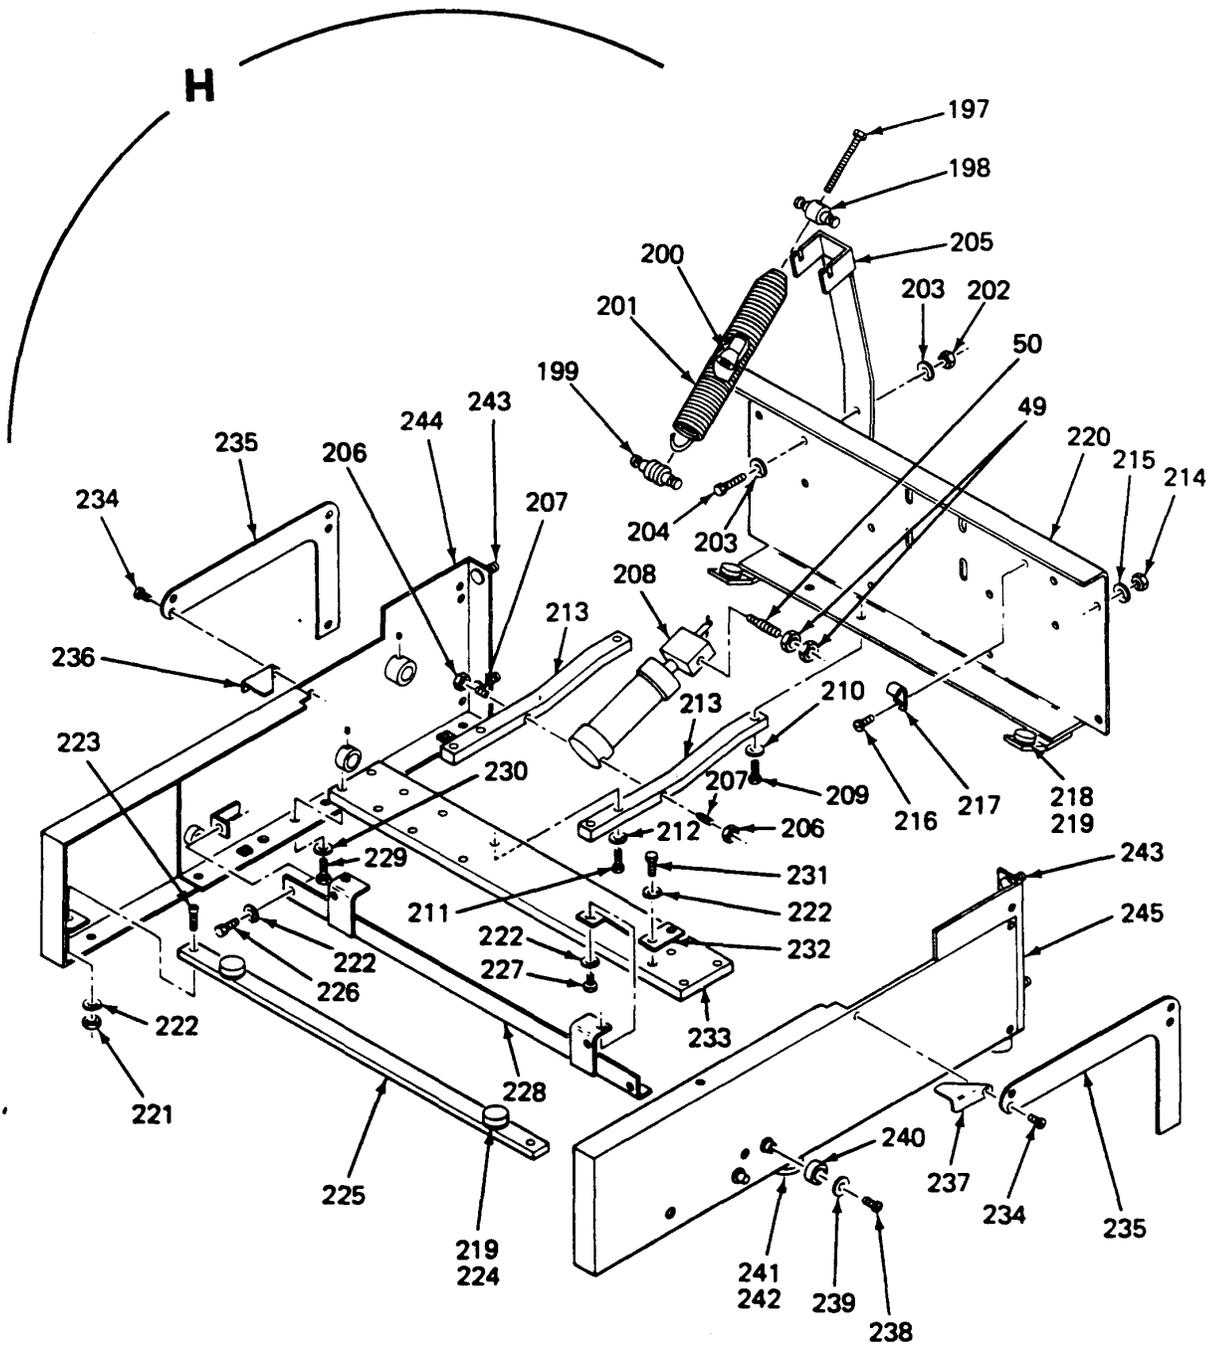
Bread Slicer, Model MB (Sheet 8 of 9)
